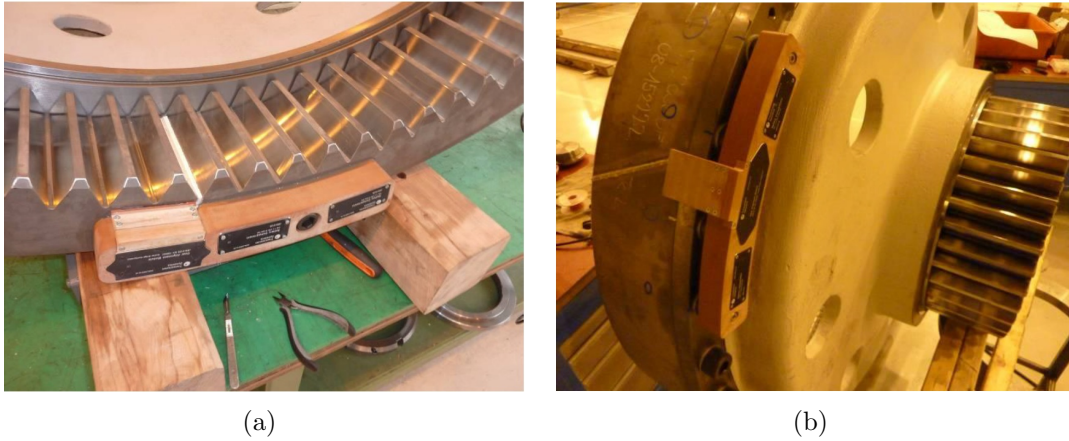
(a) A gear alignment module connected to strain gauges in the root of the stage 1 ring gear covered with a protective white coating, and (b) gear alignment module mounted on the stage 2 ring gear.
